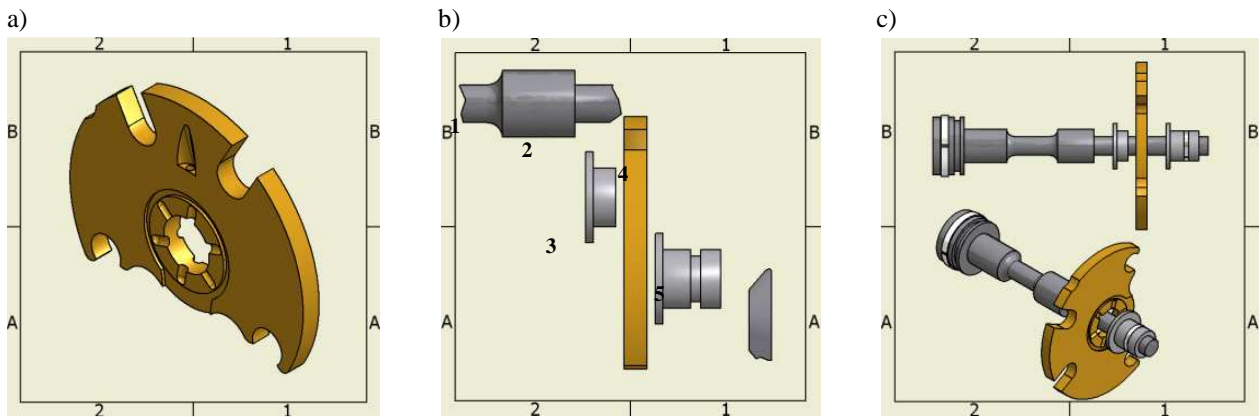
Longitudinal sliding bearing: a) disc bearings, b) the elements of bearings:
